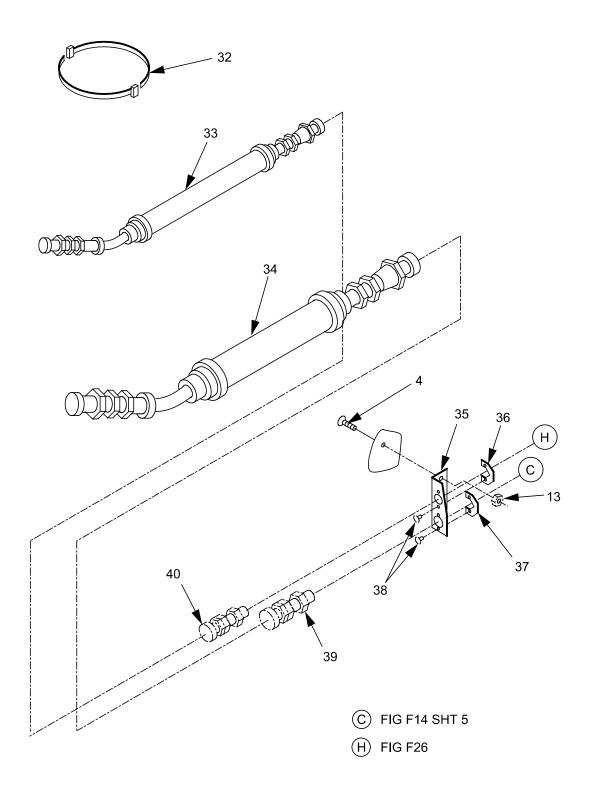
Condenser Assembly (Sheet 4 of 6)
